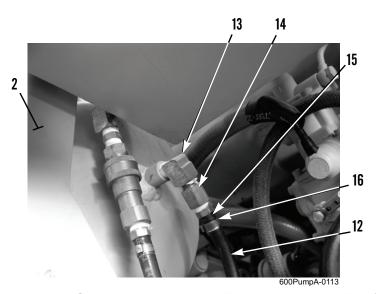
Pressure Gauge Hose and Inline Filter at Discharge Manifold.
